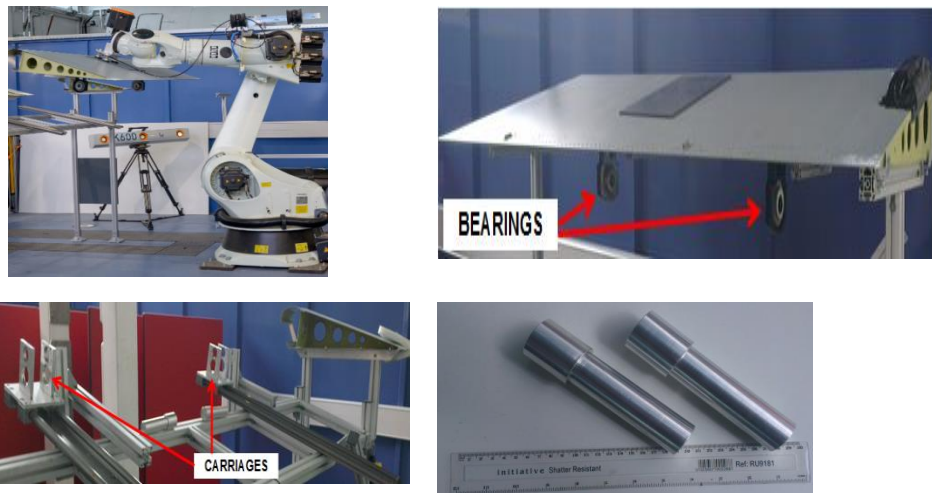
The industrial robot (top left), aerospace sub-assembly (top right), carriages (bottom left) and the bearing pins (bottom right)
